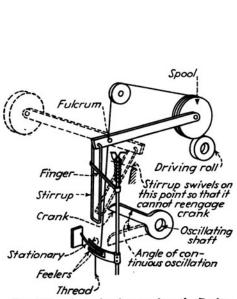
A mechanism used on the Barber-Colman spooler. When the thread breaks, the feelers are released and the spiral spring causes the spindle with finger to rotate. The latter throws the stirrup into the path of the oscillating crank, which on its downward stroke throws the spool into the position shown dotted, the stirrup then being thrown out of the path of the oscillating crank.
